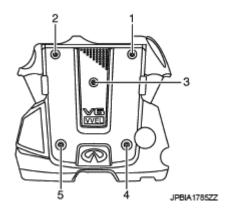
Engine Cover Mounting Bolts And Nuts Removing Order Courtesy of NISSAN MOTOR CO., U.S.A.
